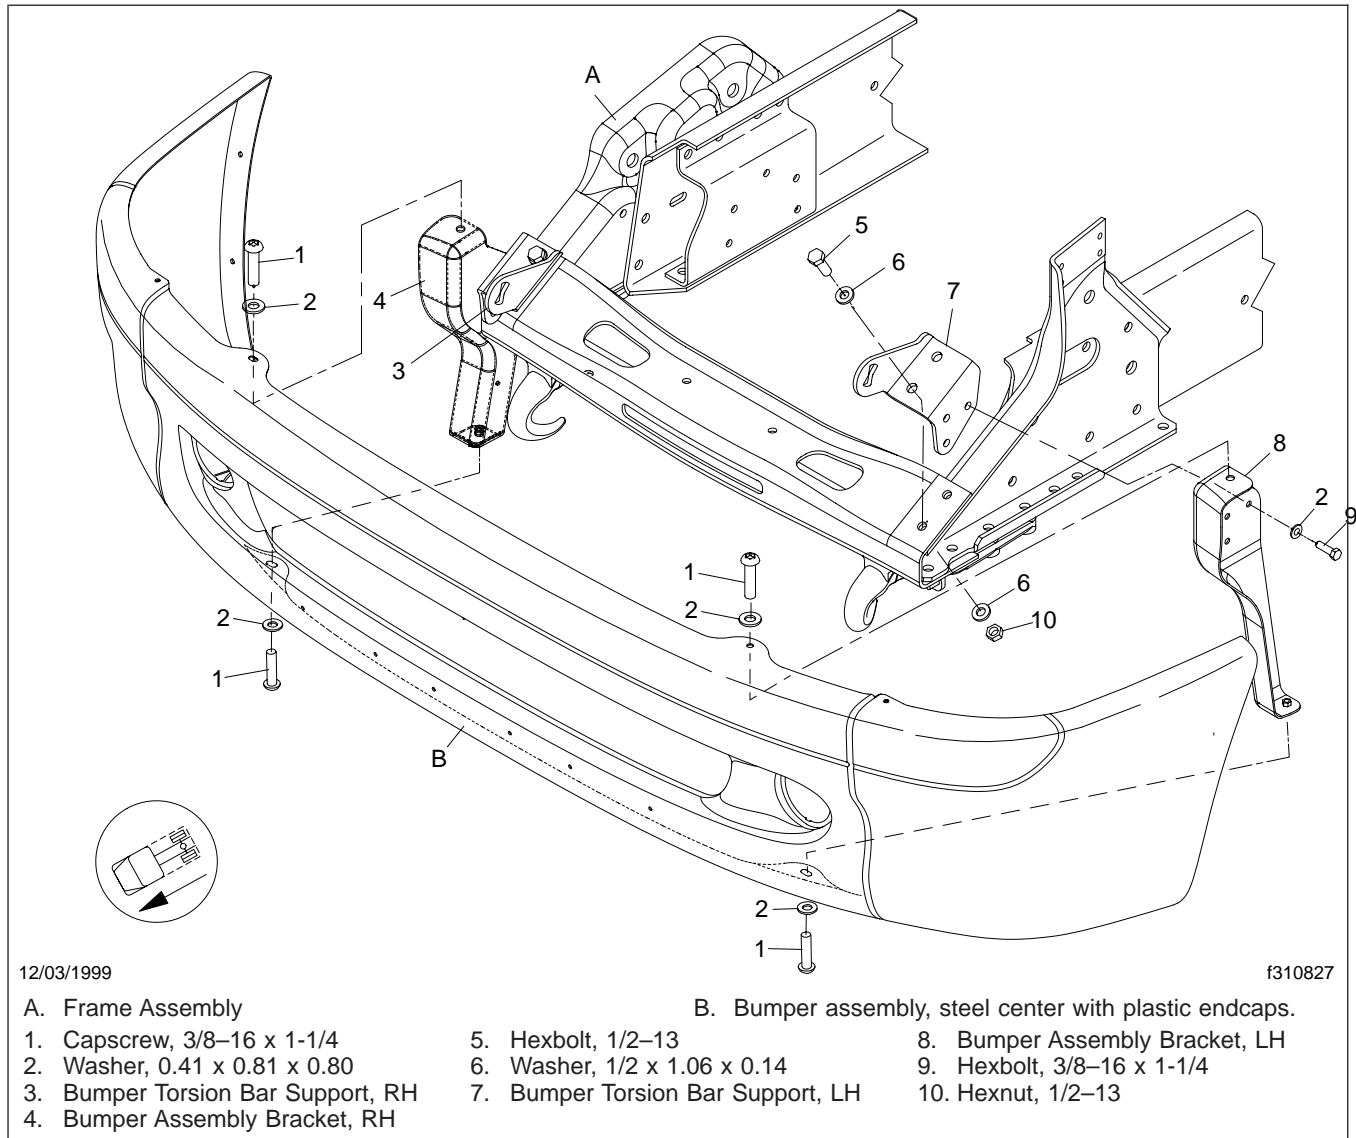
, Bumper Installation, 1350-sq-in Radiator
